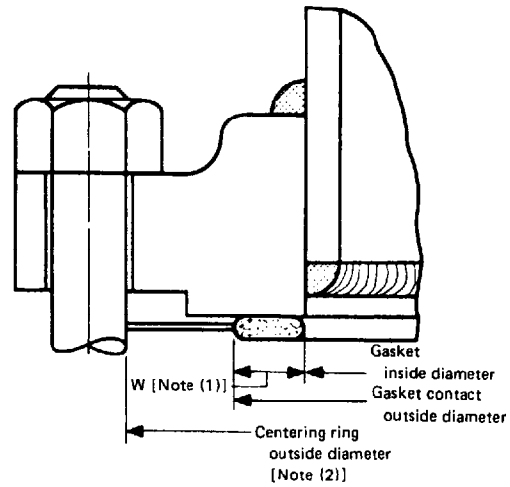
³ LARGE TONGUE WIDTH GASKET WITH GASKET I.D. EQUAL TO PIPE I.D., WITH CENTERING RING
